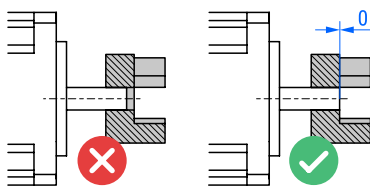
Coupling hub and motor shaft alignment for the non-standard motor adapter.
